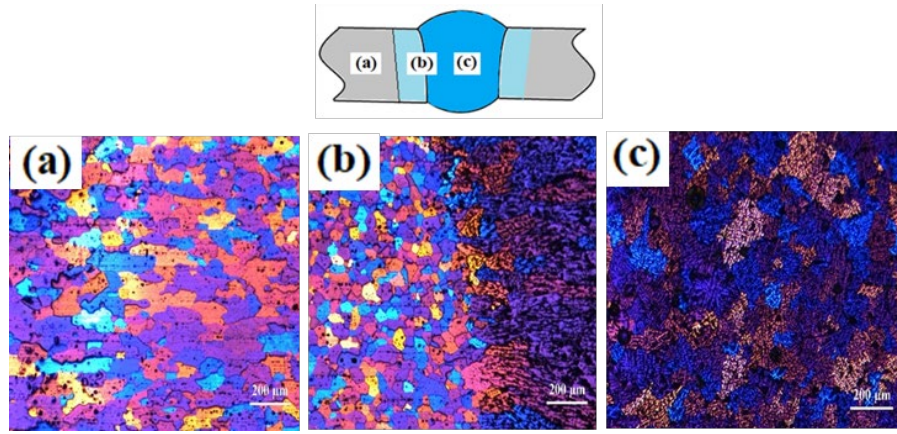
Grain morphology of the (a) BM, (b) HAZ, and (c) FZ in the joints welded with Mg1.4 filler.
